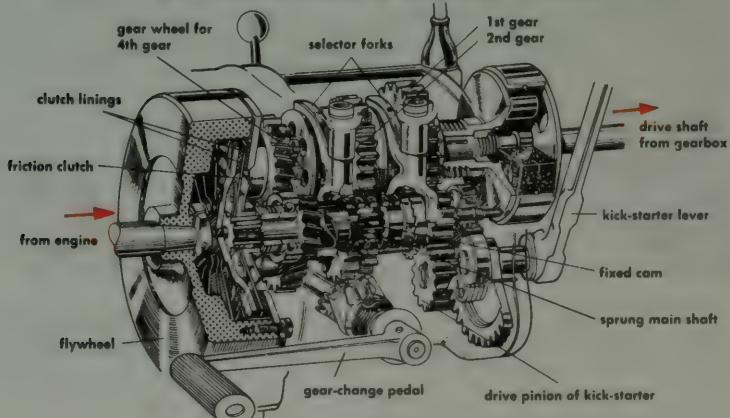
FOUR-SPEED GEARBOX OF MOTOR CYCLE
